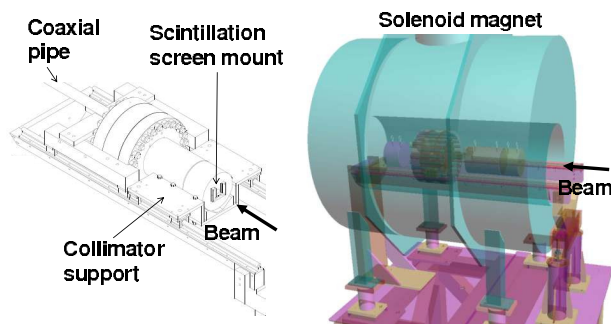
A CAD drawing of the collimator-cavity assembly and a 3D illustration of its installation inside the magnet (courtesy of R. Stewart).
